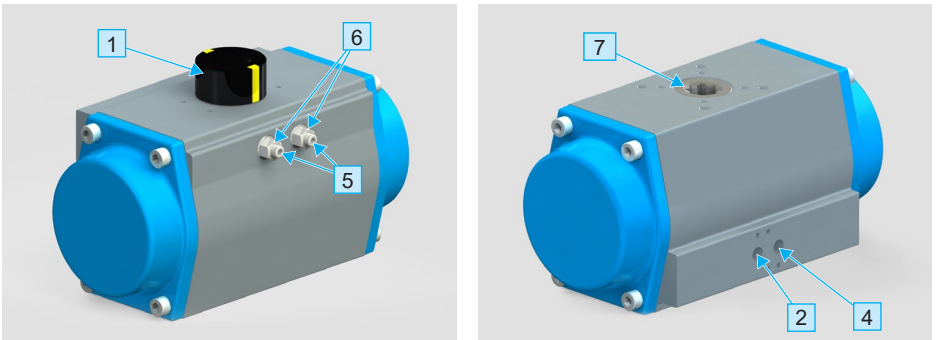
GDA/GSR-125 overview of components (left: top view, right: bottom view)
